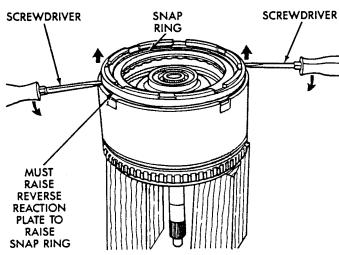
Seating Snap Ring to Determine Reverse Clutch Clearance
